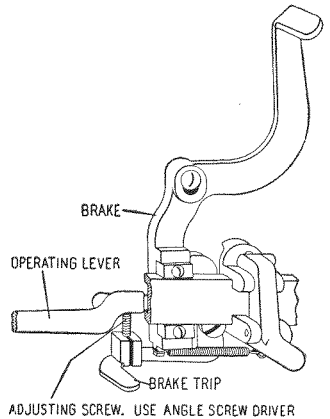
View of the brake trip on the assembler slide and the screws for adjusting same so that the assembler slide will be permitted to go freely to the left while the line is being assembled, and will be prevented from going backward until the line is sent up to be transferred to the first elevator, at which time the spring returns the assembler slide to its primary position.
